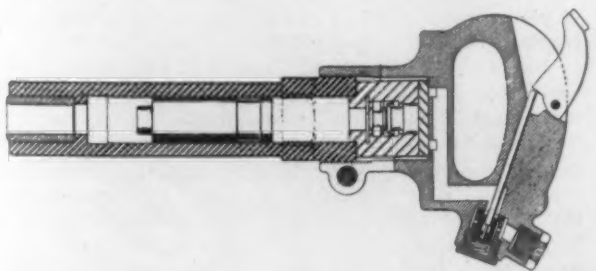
Sectional View of the Cleveland Steel Casting Chipping Hammer.
